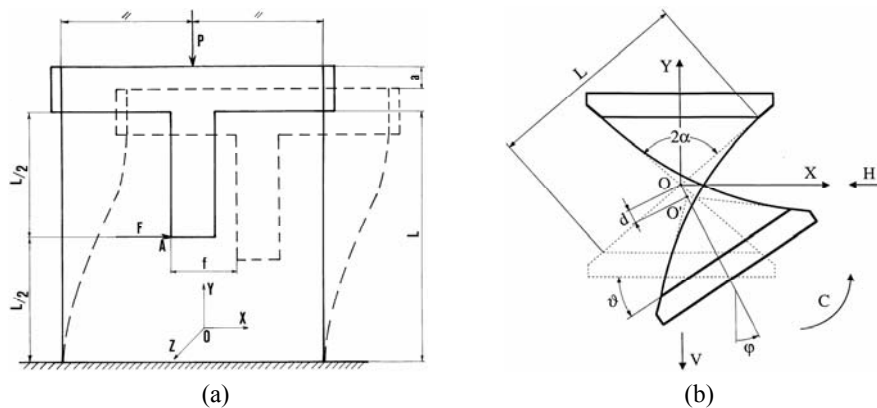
Parallel spring translator (a) and cross-spring pivot (b)
